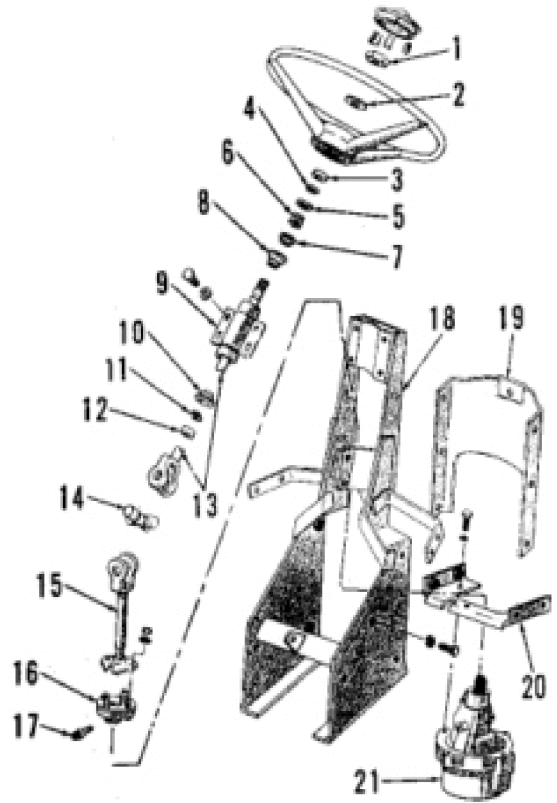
Exploded view of the Saginaw Hydramotor steering unit. Also refer to Figs. 48 to 51 for photos showing disassembly and reassembly techniques.
